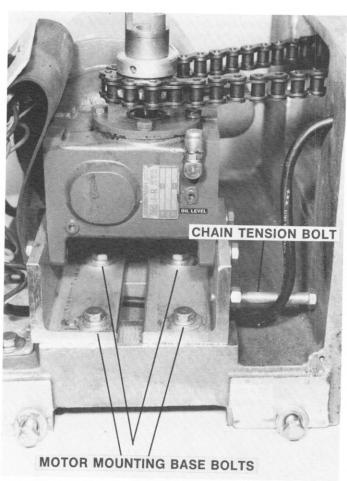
Chain, Motor Mounting Base Bolts and Chain Tension Bolt
